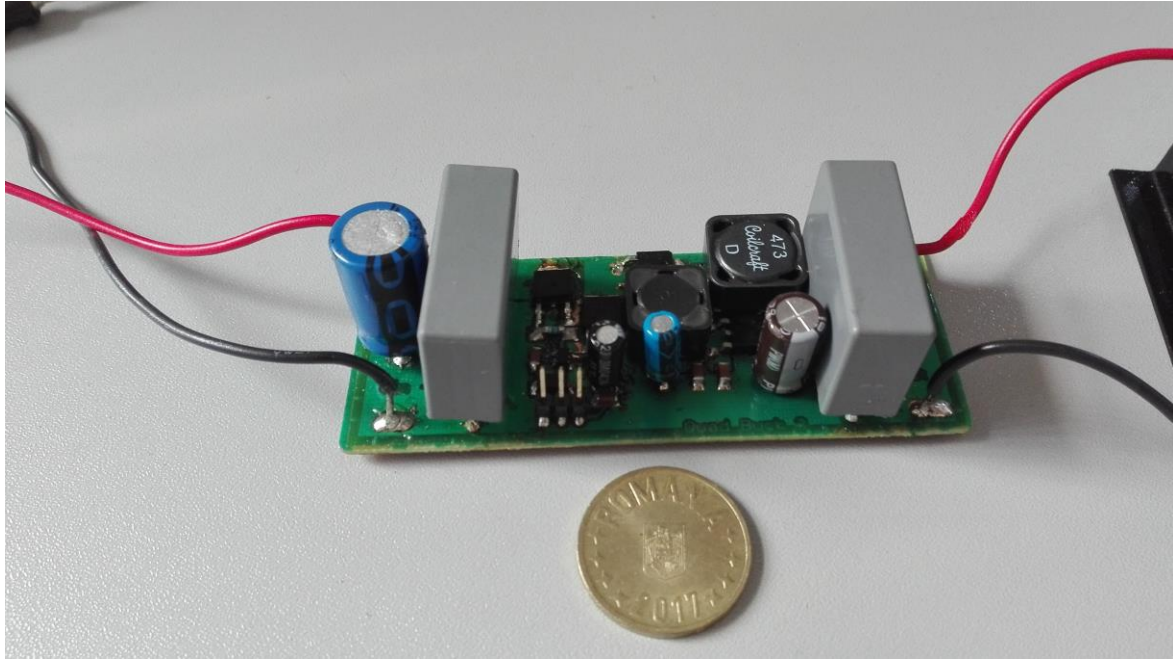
The assembled PCB of the ZL3-Buck solar prototype [original]
